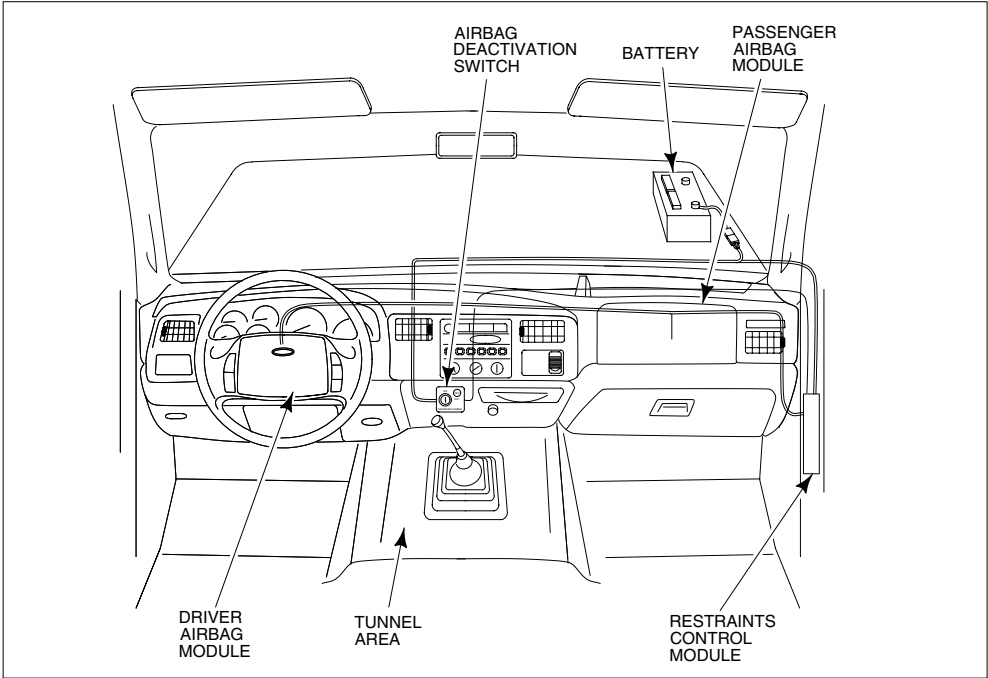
FIGURE A - RANGER OCCUPANT PROTECTION ZONE
